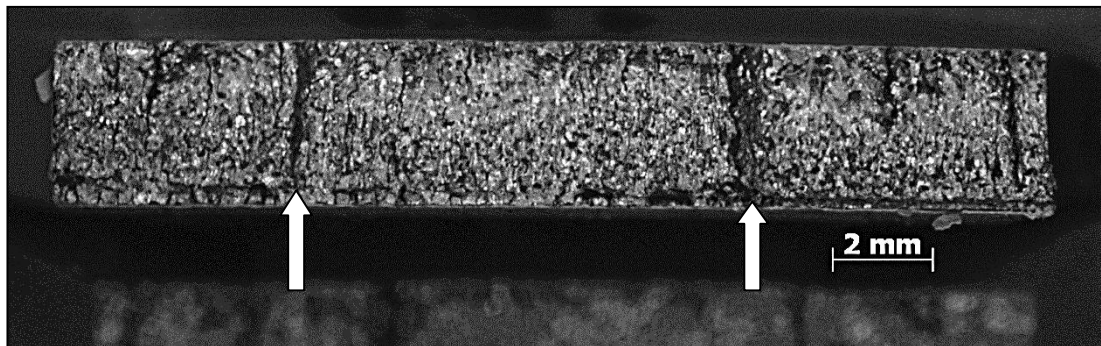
Indication of fatigue failure of mechanically formed specimen
